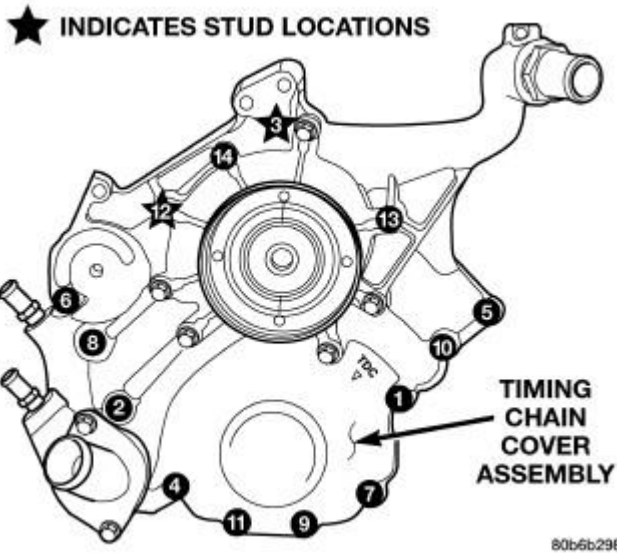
Timing Chain Cover Fasteners Removal/Installation Sequence
